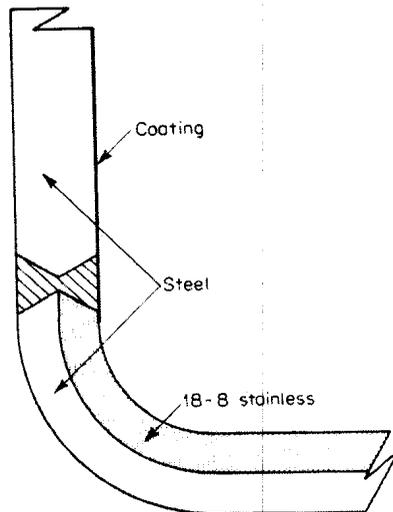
Detail of welded steel and stainless clad tank construction.
